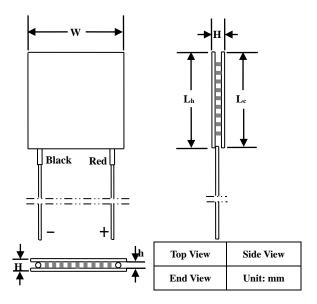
Mechanical Dimensions of Non-sealed ATE1-TCHE-127
